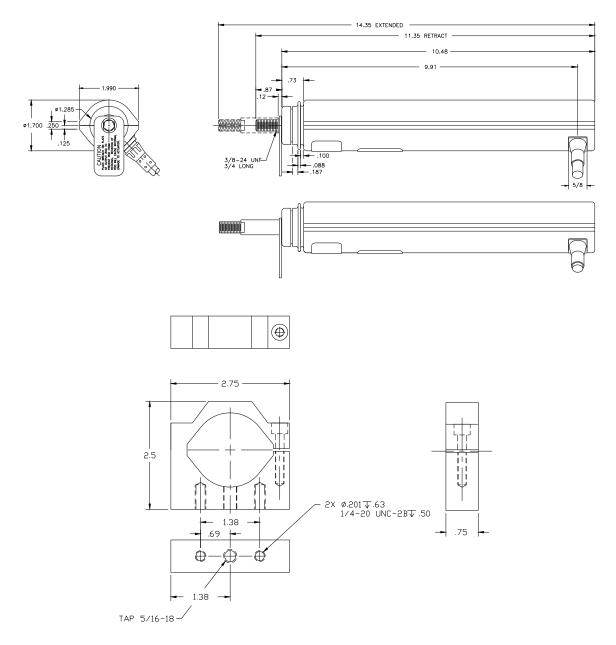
722 Series Actuator with Mounting Clamp (dimension in inches)
